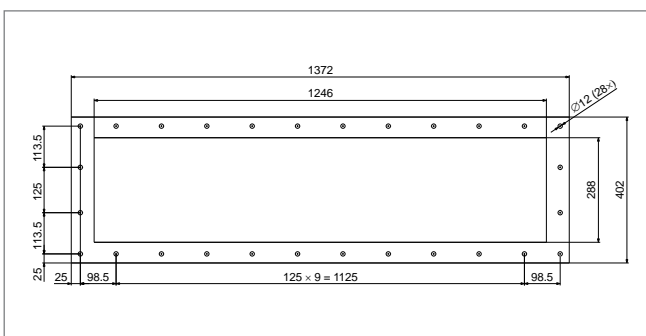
Dimensional drawing for extract air and exhaust air duct (dimensions in mm)
